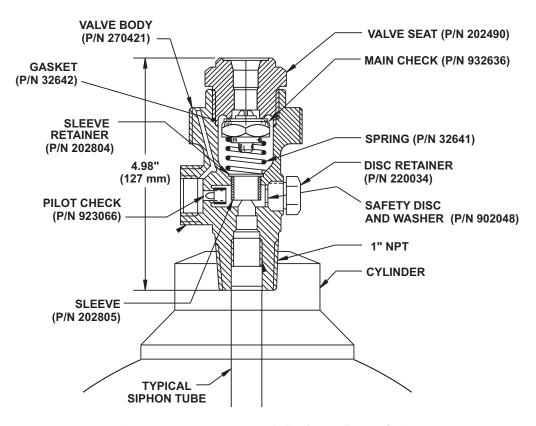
Type "I" Cylinder Valve, 1/2 in.
